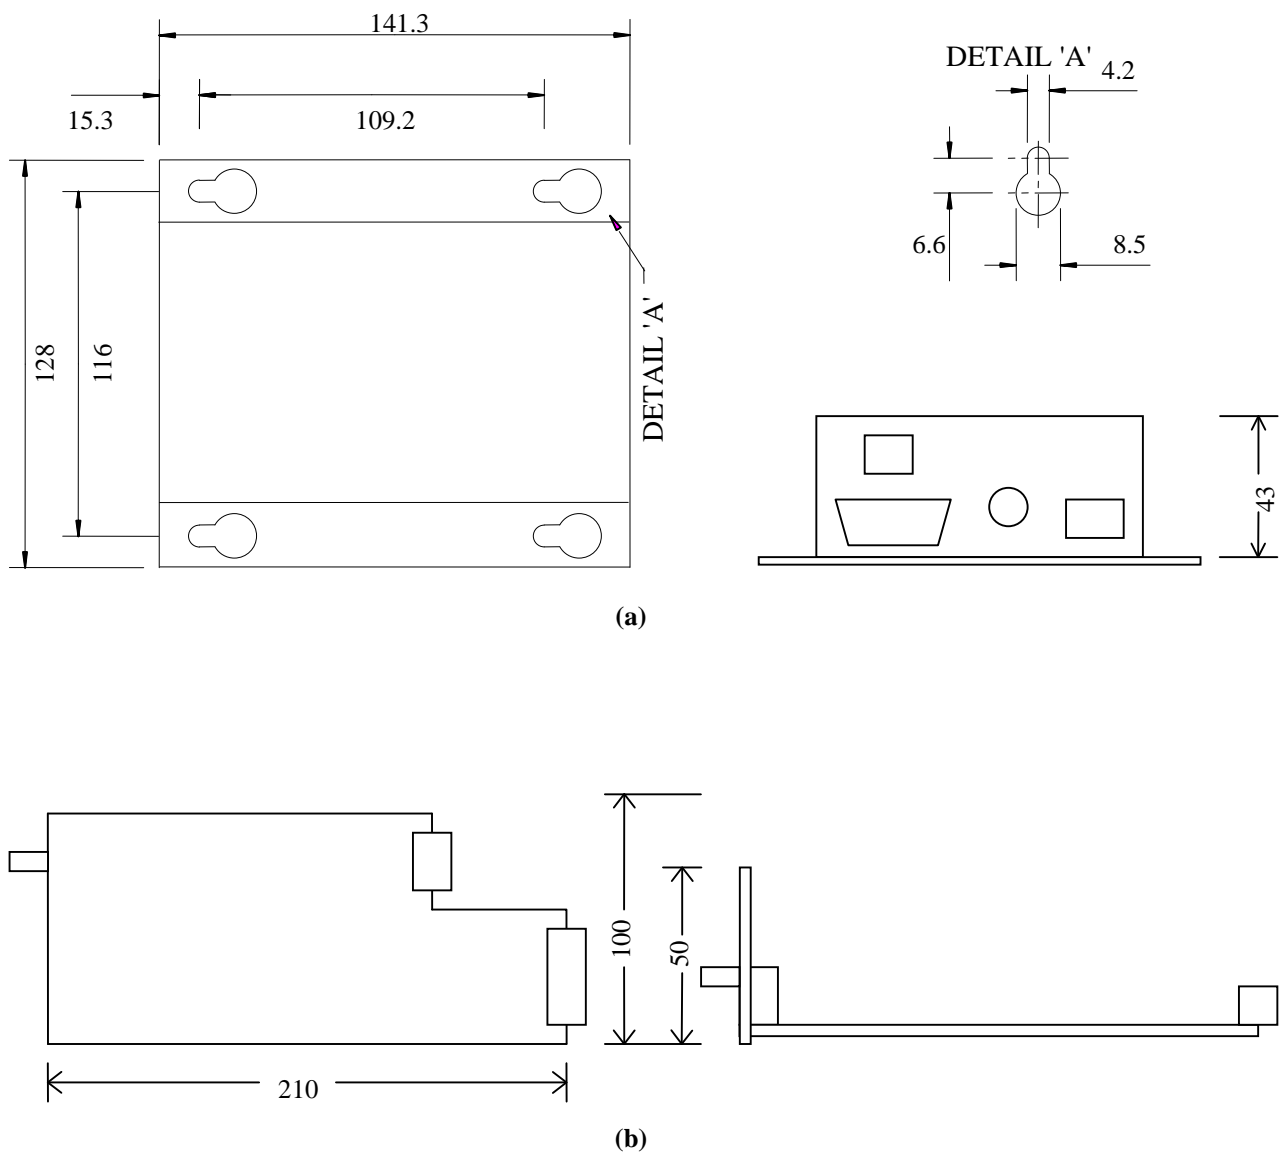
OSD840 CASE MOUNTING DIMENTIONS
